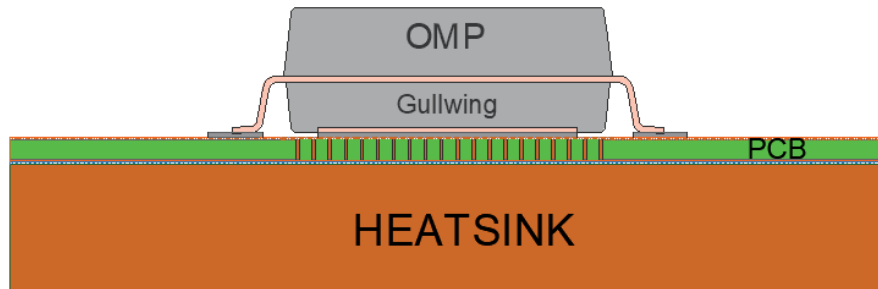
PCB with vias bonded to a heat sink, intended for gullwing low power packages
